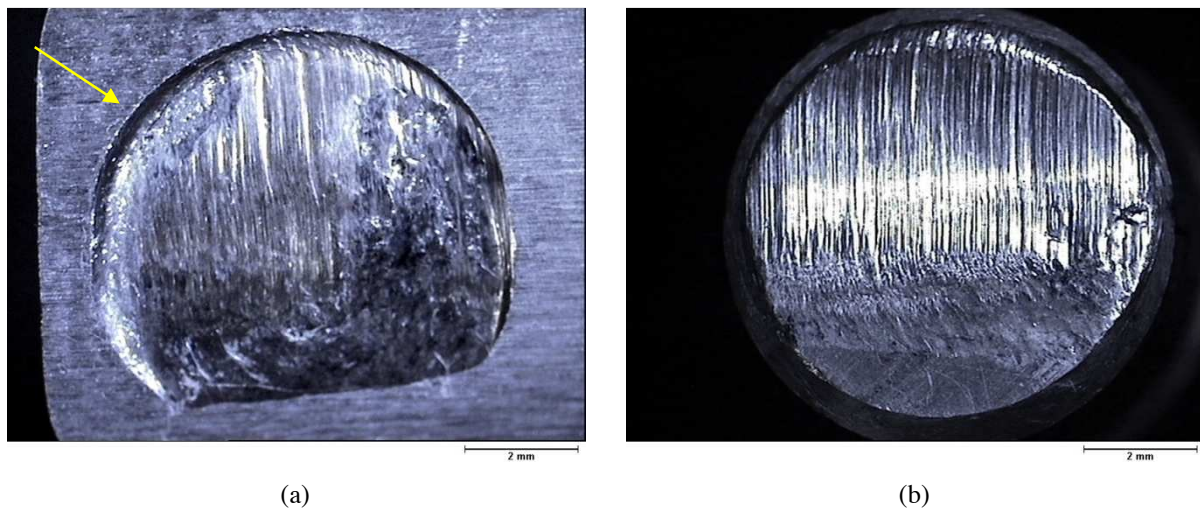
Wear damage at the rocker arm - exhaust valve interface: (a) rocker arm, (b) exhaust valve.
